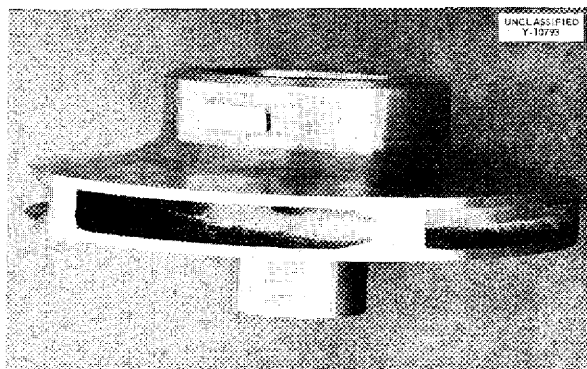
ARE Pump Impeller Fabricated by Welding and Machining.
